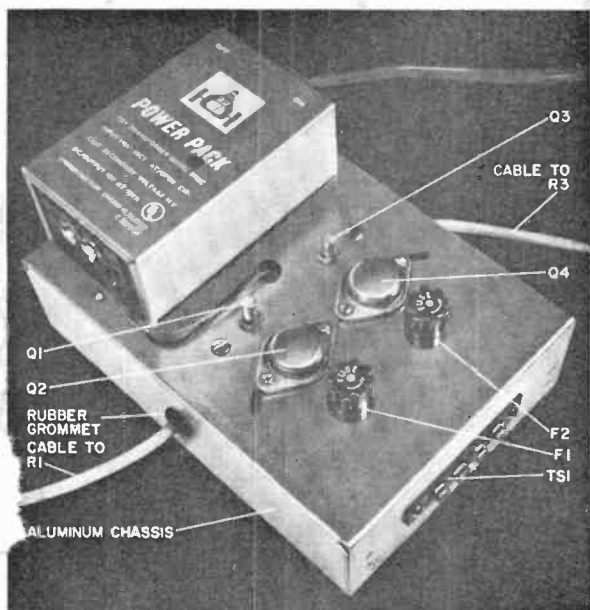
Large chassis allows plenty of room for mounting the power pack. Use mounting kit for Q2 and Q4, and be sure to mount Q1 and Q3 on sockets. Cables at sides of chassis go to speed controllers.
